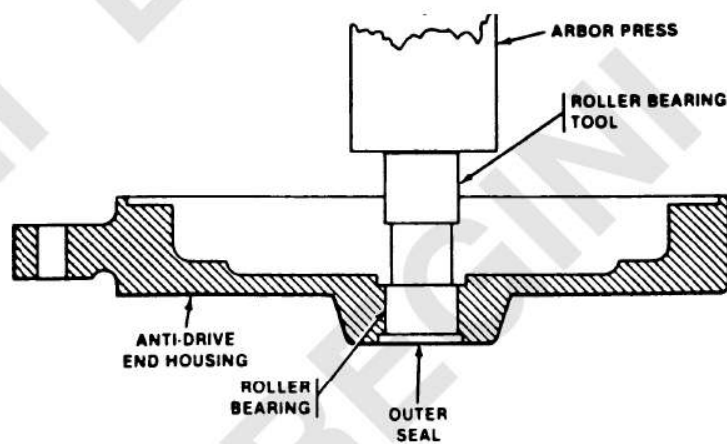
Roller Bearing and Outer Seal Removal from Anti-Drive End Housing.
